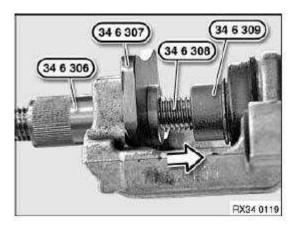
Identifying Special Tool 34 6 309, 34 6 306, 34 6 307 And 34 6 308 Courtesy of BMW OF NORTH AMERICA, INC.
